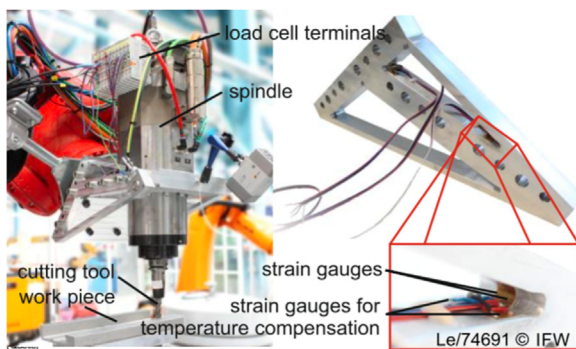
Force sensing spindle holder for a KUKA KR 500-2 milling robot.
